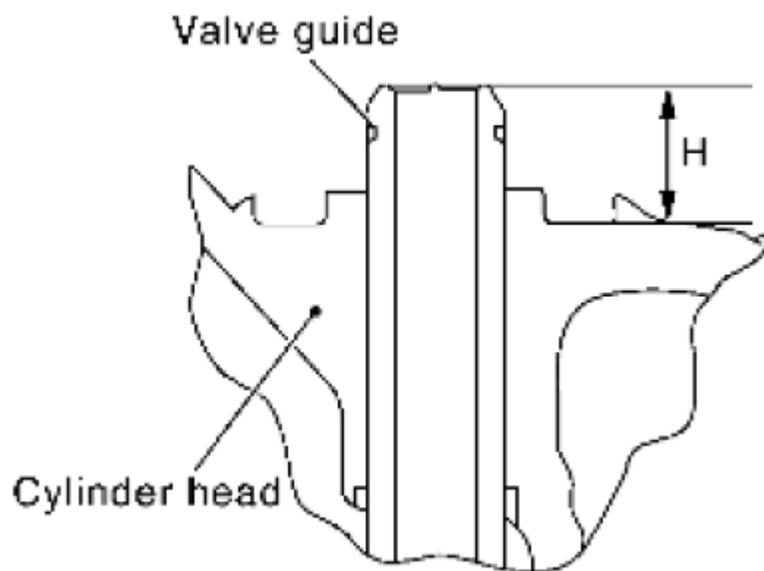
Identifying Projection For Pressing Valve Guide From Camshaft Side
